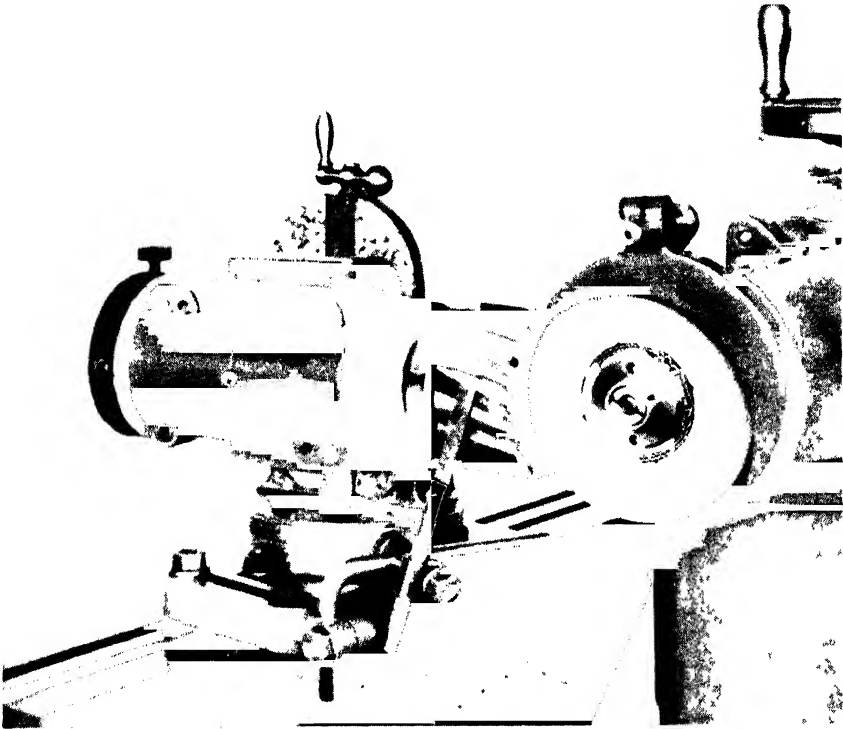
Sharpening the End Teeth of a Shell-Type Face Mill
